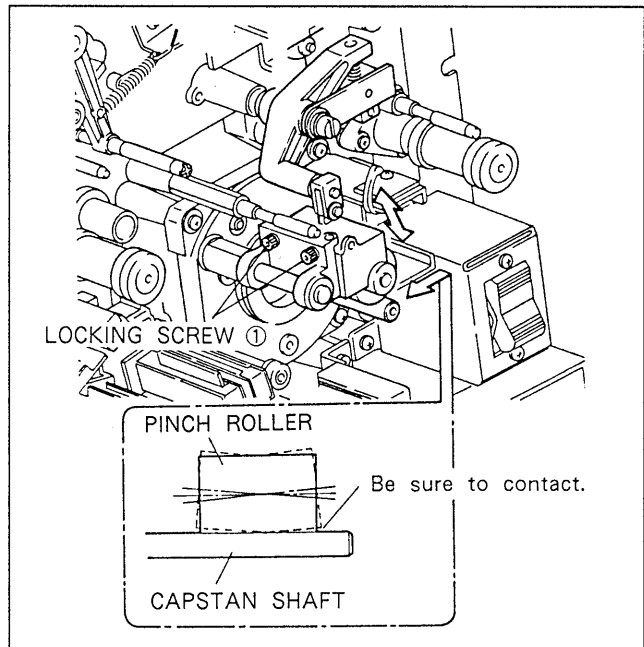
Pinch Roller Slantness Adjustment
